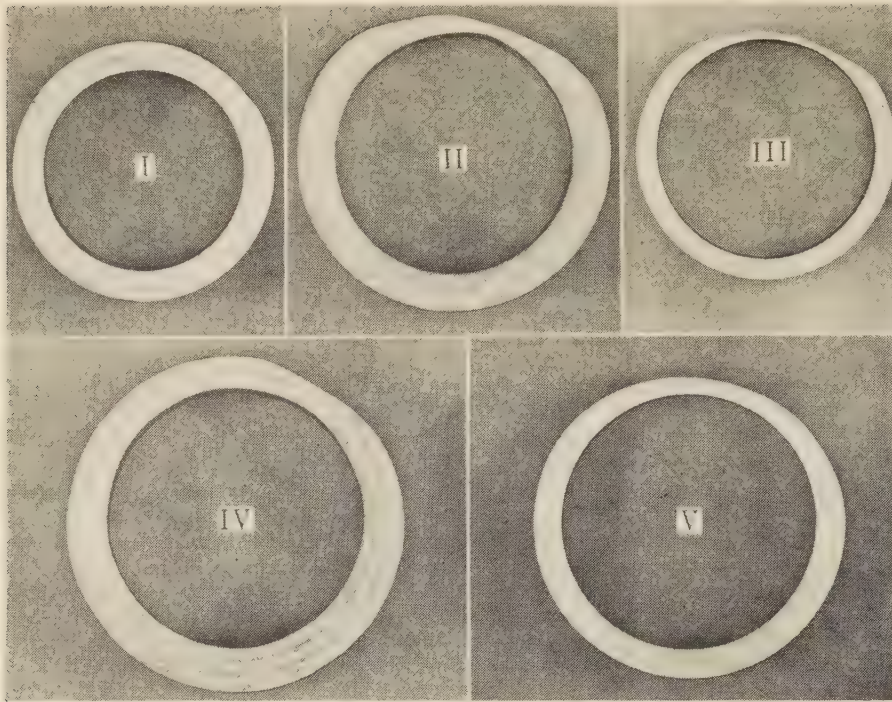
CROSS SECTIONS OF TYPICALLY CORRODED FURNACE-WALL TUBES
